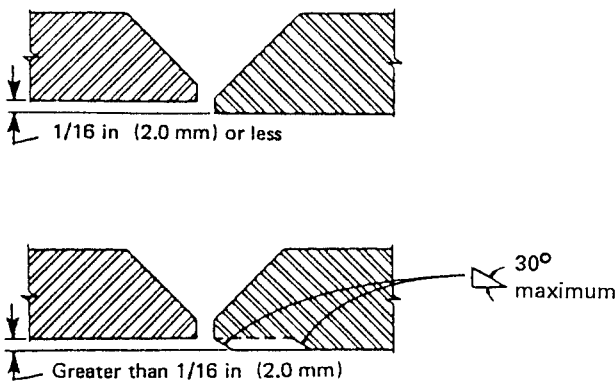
Butt welding of piping components with internal misalignment. (ASME B31.1 Power Piping Code, 1995 ed.)
